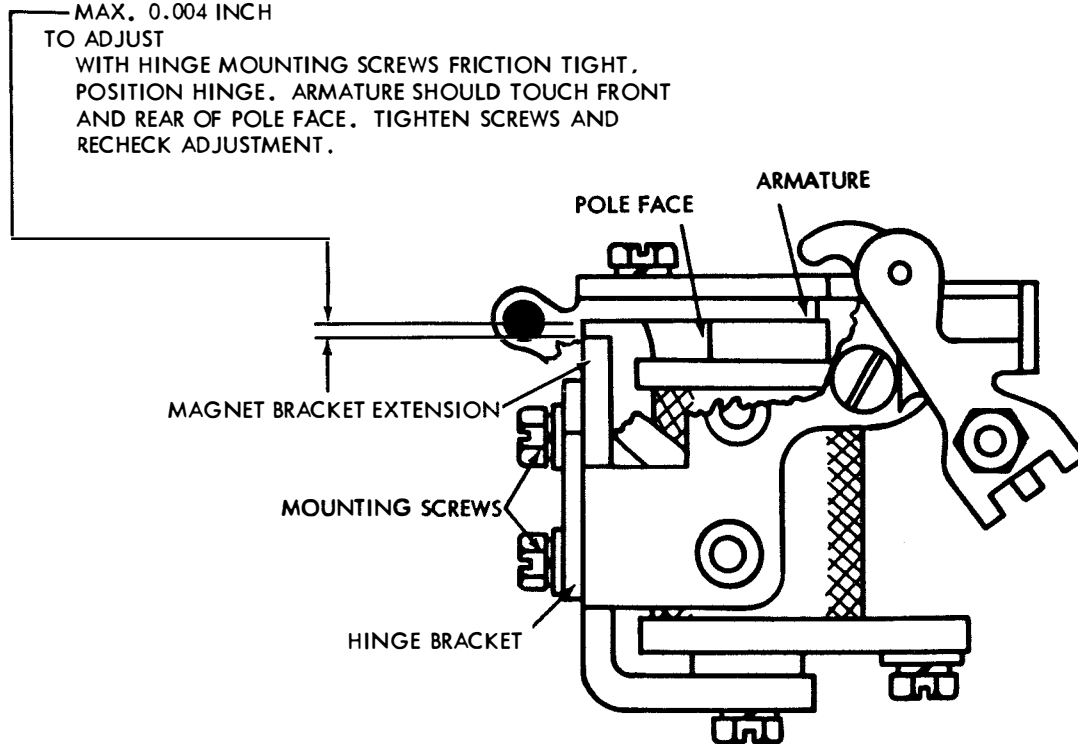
Back Space Mechanism (TT-253A/UG)
